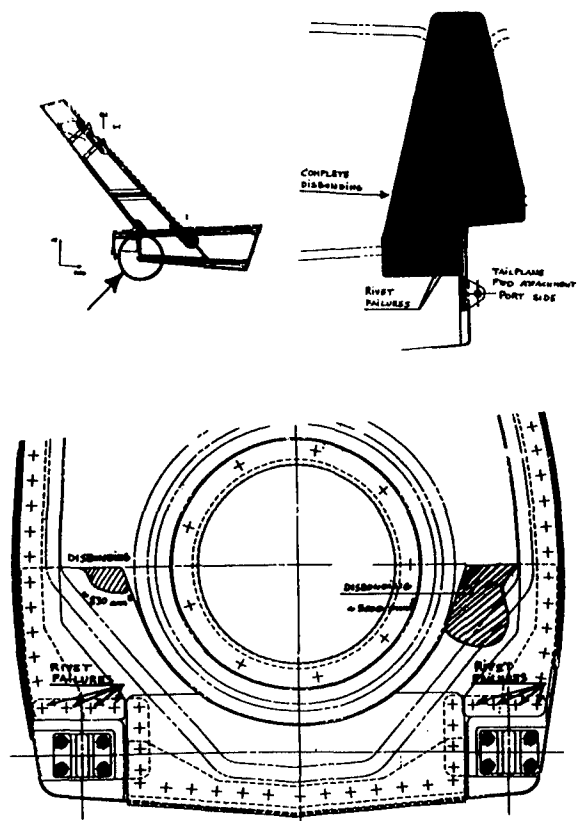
EH101 Tail Unit subcomponent for flaw tolerance test - Tailplane FWD Attachments Area
